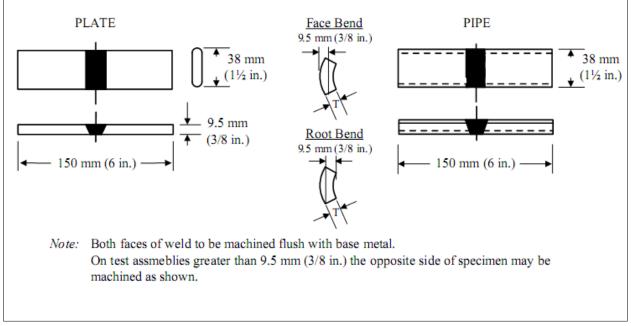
Test No. 2 – Guided Bend Test for Root Bend and Face Bend (Plate or Pipe)
